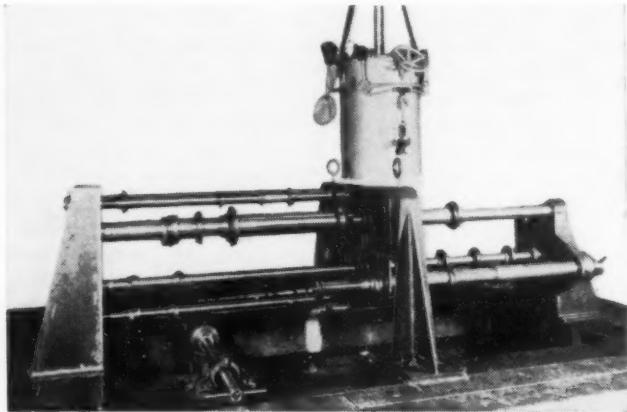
POURING FIXTURE FOR LOCKING BUSHINGS IN BED
